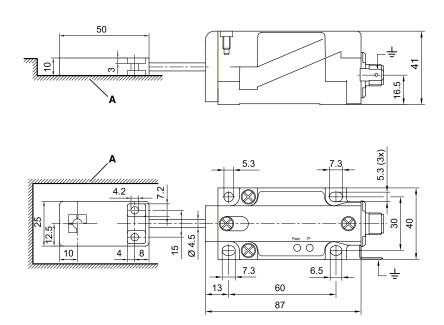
Processor BIS L-409-045-004-07-S4, dimensions in mm
